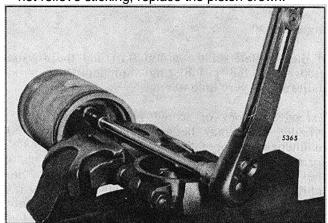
Tightening Connecting Rod to Piston Pin Bolts
